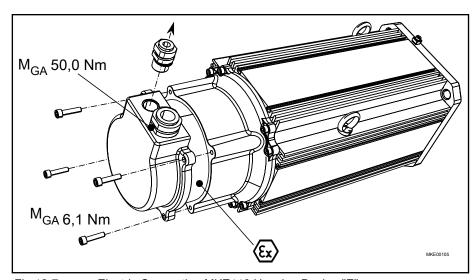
Electric Connection MKE118 Housing Design "E"
